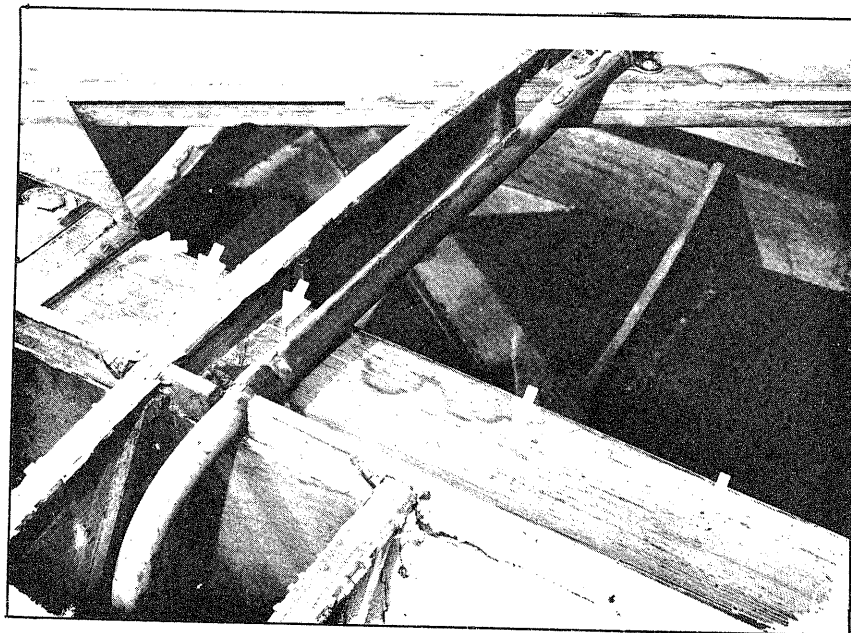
TYPICAL LOWER BOOM FRONT SPAR FAILURE - PROCTOR OUTER WING.
